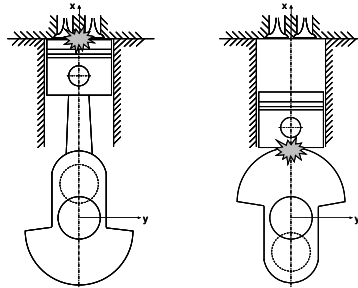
Collision scenarios: piston - cylinder head/valves; piston - balance weight
